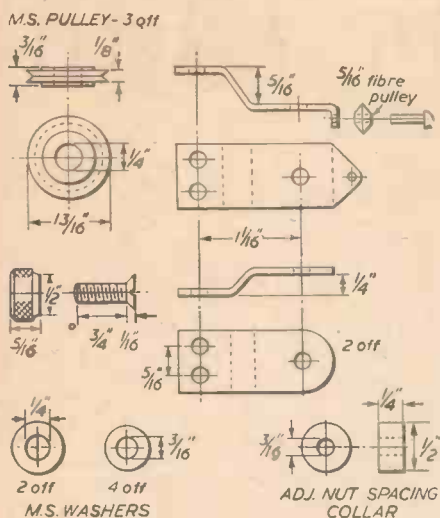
Details of the P-shaped frame, the eye-bar and adjusting nut.
